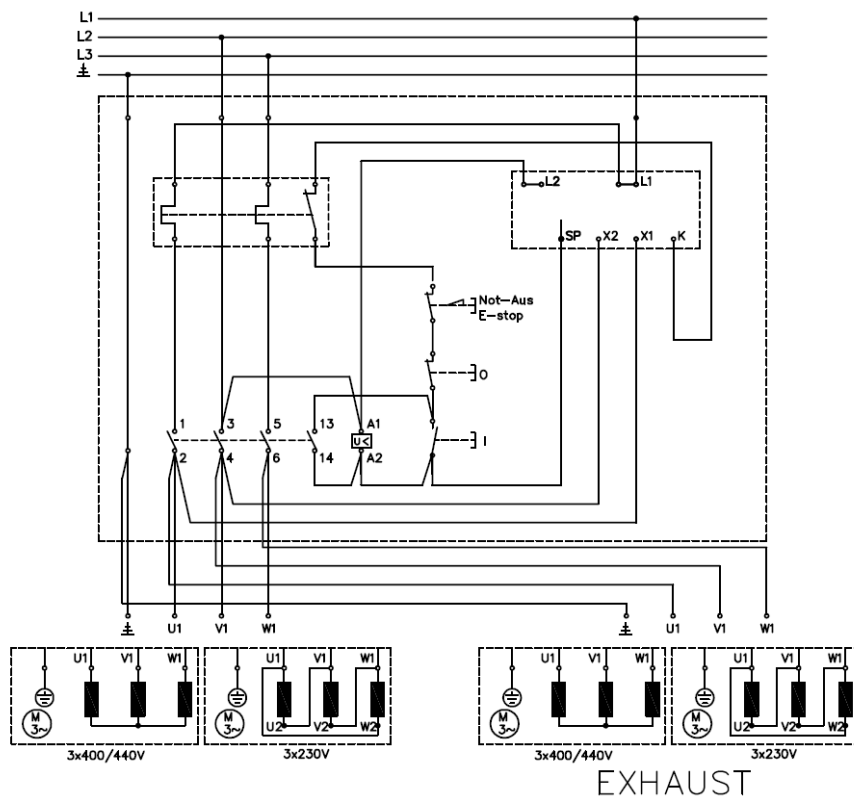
Diagram of belt grinder with brake and exhaustmotor.
